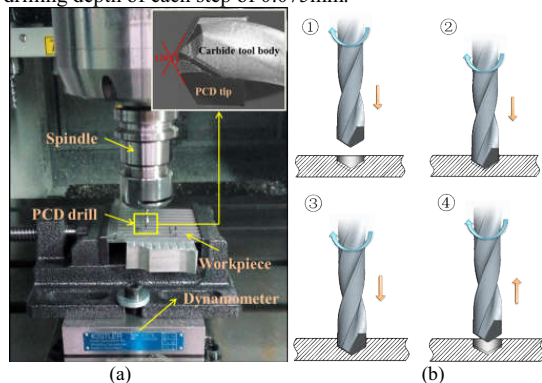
Peck drilling experiment. (a) experiment setup; (b) 4 parts of one step.
